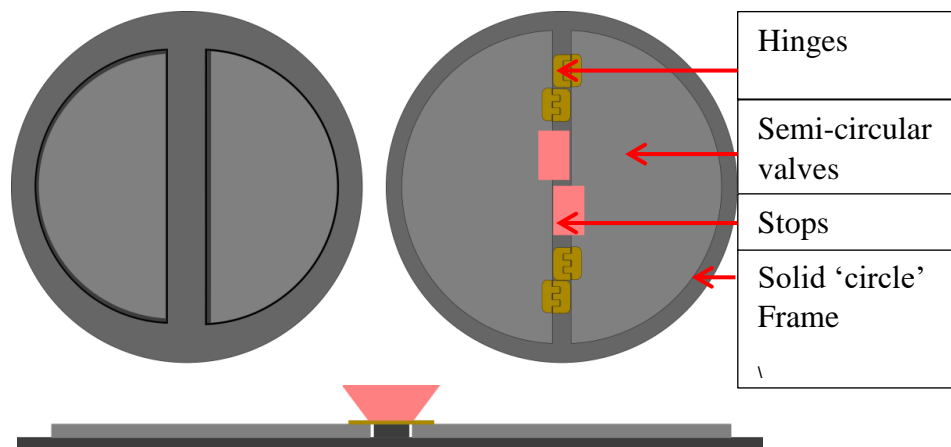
On the left rear view, on the right front view and at the bottom side view of the final heart valve
